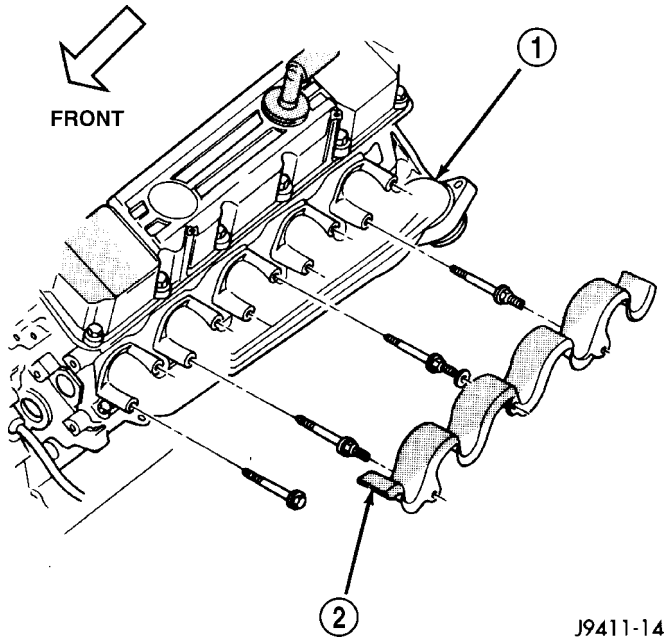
8.0L Engine Exhaust Manifold—Typical
